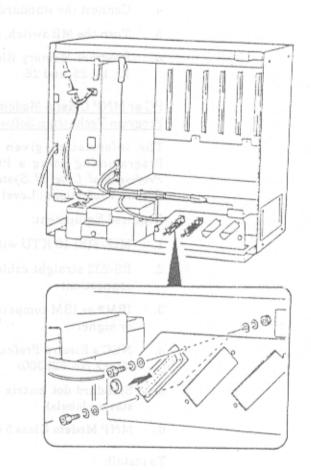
Connecting the MIF Cable Assembly and the MIF-F(S)-10 KTU to the Basic KSU
